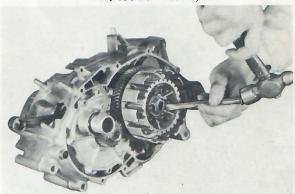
Straightening clutch sleeve hub washer with chisel and hammer
